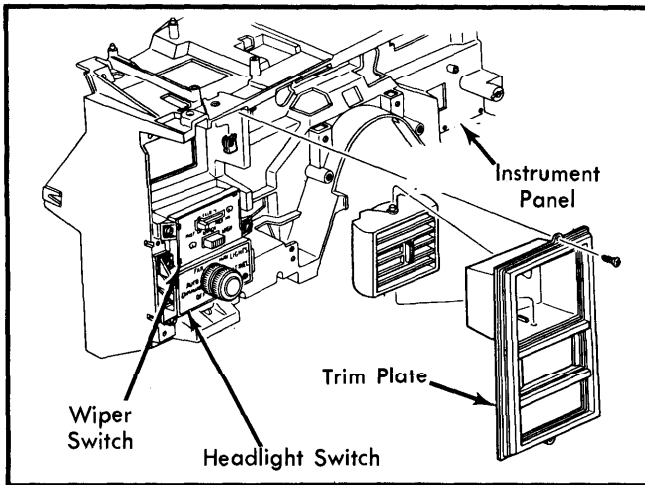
Left Trim Plate Removal (Eldorado and Seville)
